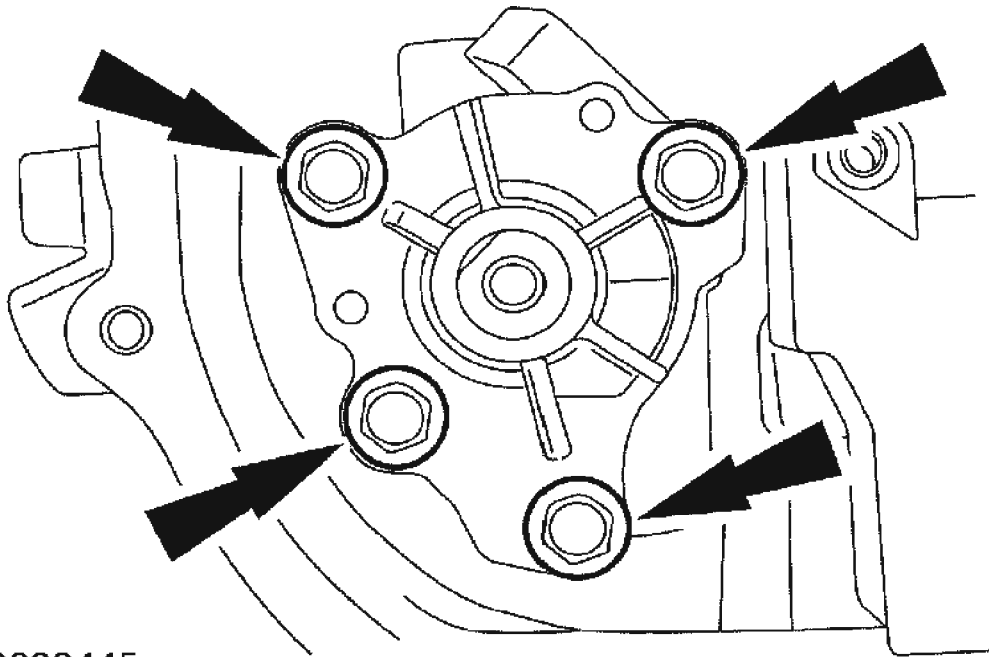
Removing Oil Pump Pickup Tube Bolts
